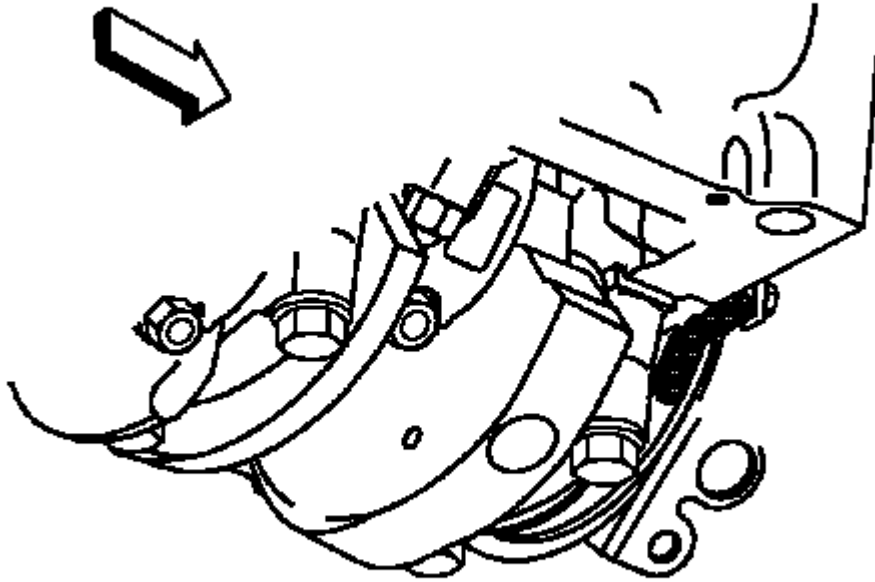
Applying Adhesive To Sides Of Front Cover To Engine Block Junction At Oil Pan Sealing Surfaces
